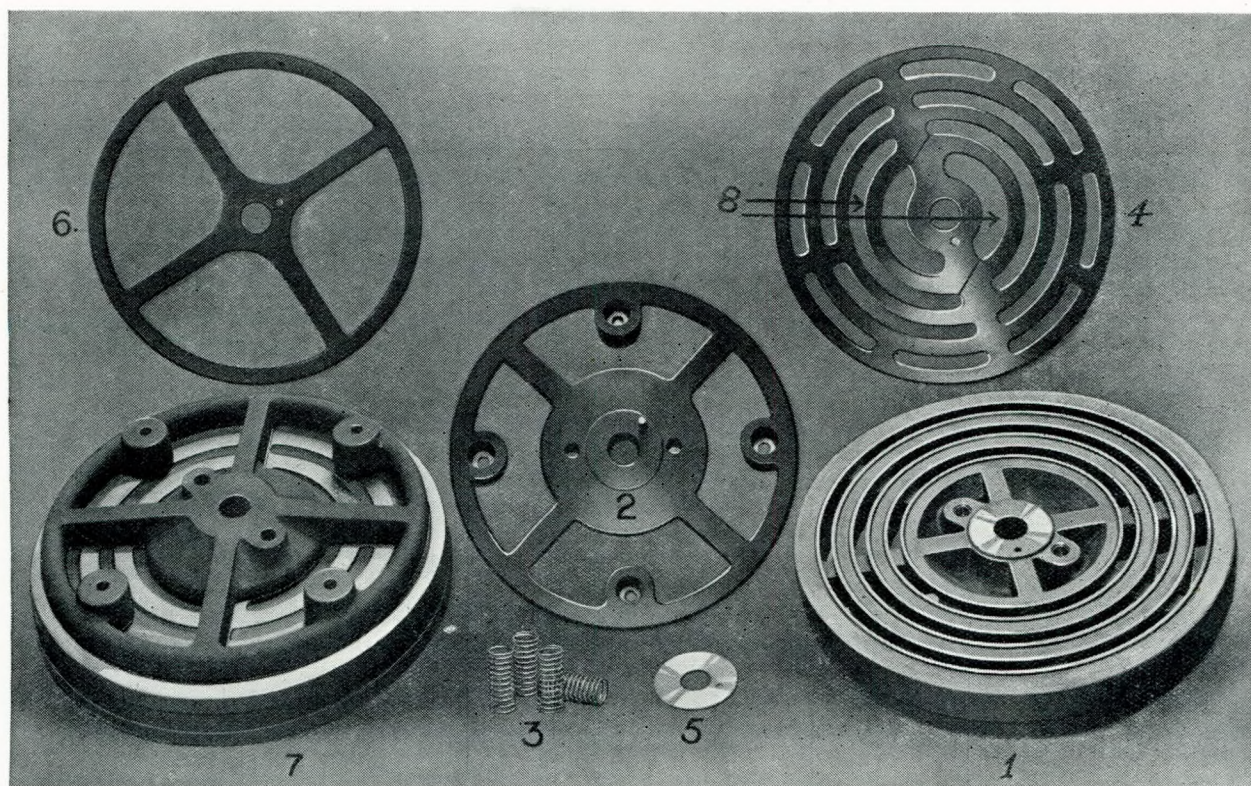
Complete assembly of a Rogler Hoerbiger valve.
